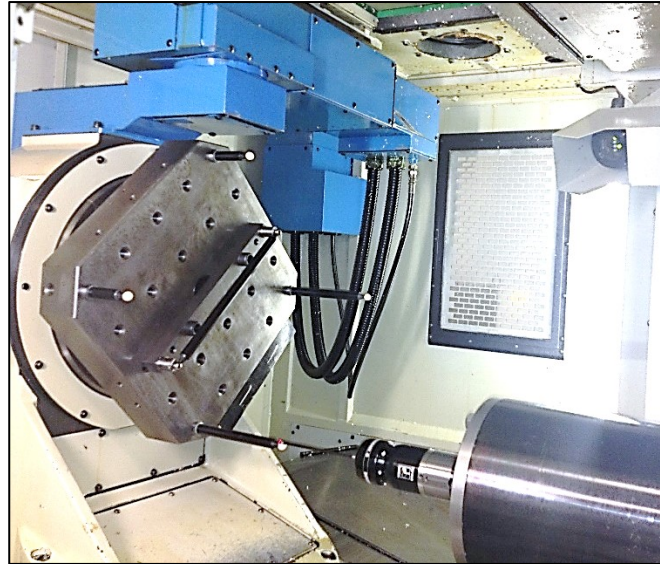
A scale bar and master balls being measured with an MP700 Renishaw probe on a Mitsui Seiki HU40-T machine tool of wCBXbZY(C1)t topology
